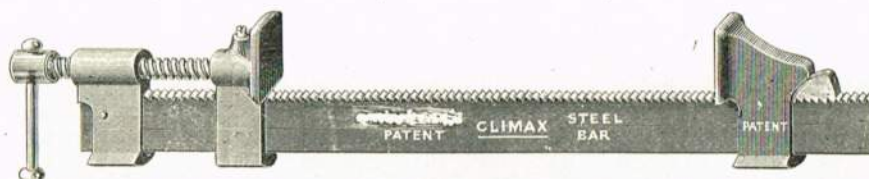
INSTANT RACK ADJUSTING CRAMPS.
